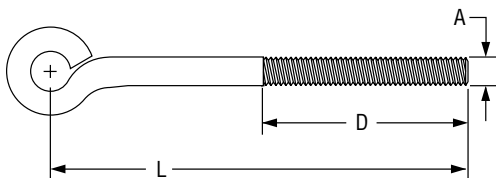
, FIG. 248L: LOADS (LBS) • DIMENSIONS (IN)
